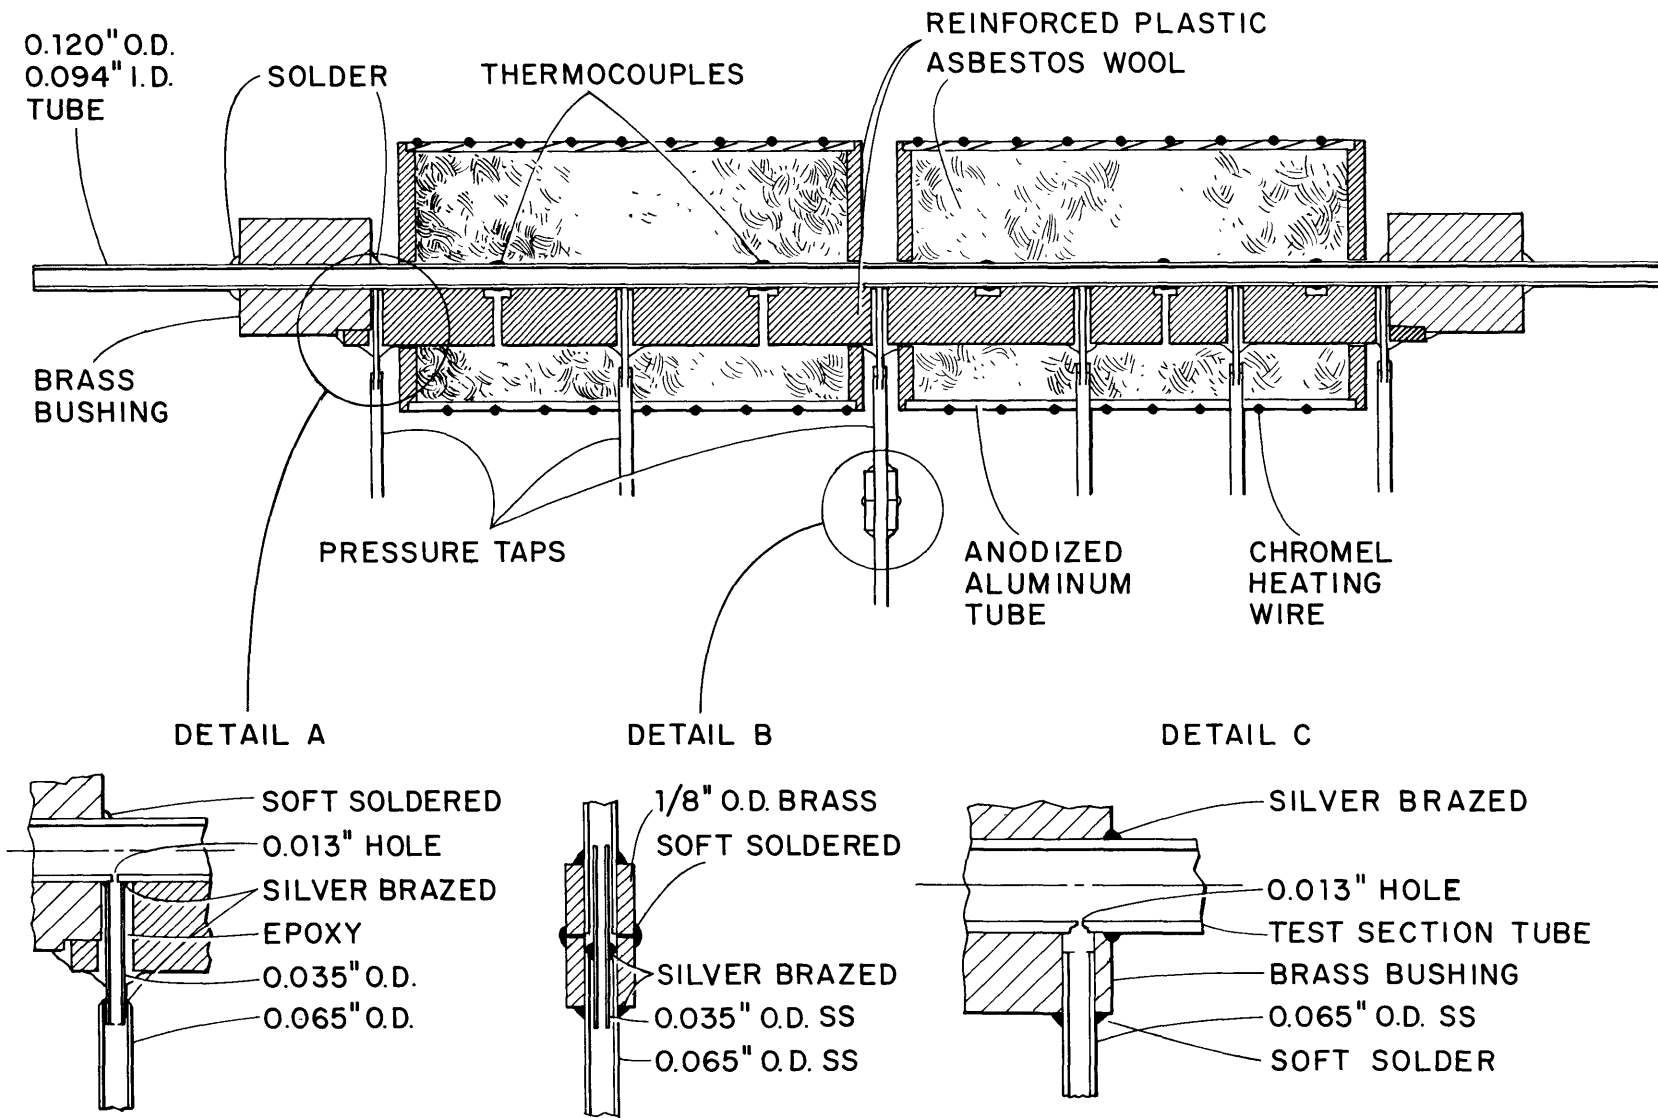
DETAILS OF TEST SECTION CONSTRUCTION
